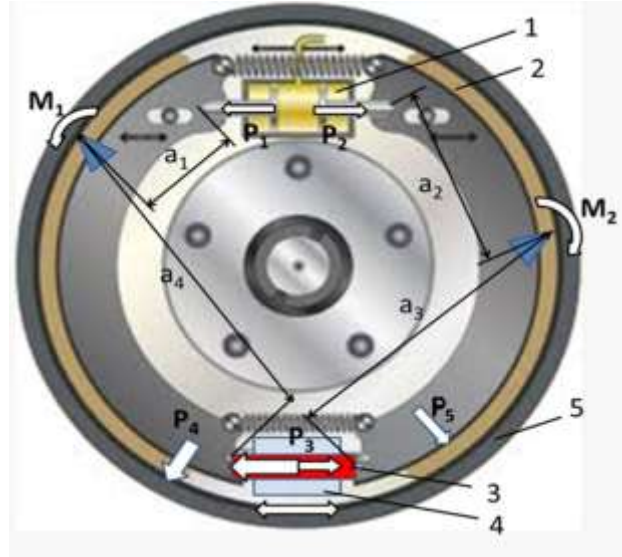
Schematic of the floating brake-shoe design. 1 – working hydraulic cylinder; 2 – brake shoe; 3 – movable rod installed between the shoe ends; 4 – groove of the movable rod; 5 – brake drum; M_1 and M_2 – moments causing rotation of the shoes; a_1 , a_2 , a_3 , and a_4 – force lever arms; P_1 and P_2 – hydraulic forces; P_3 , P_4 , and P_5 – forces acting on the shoes and the drum.
